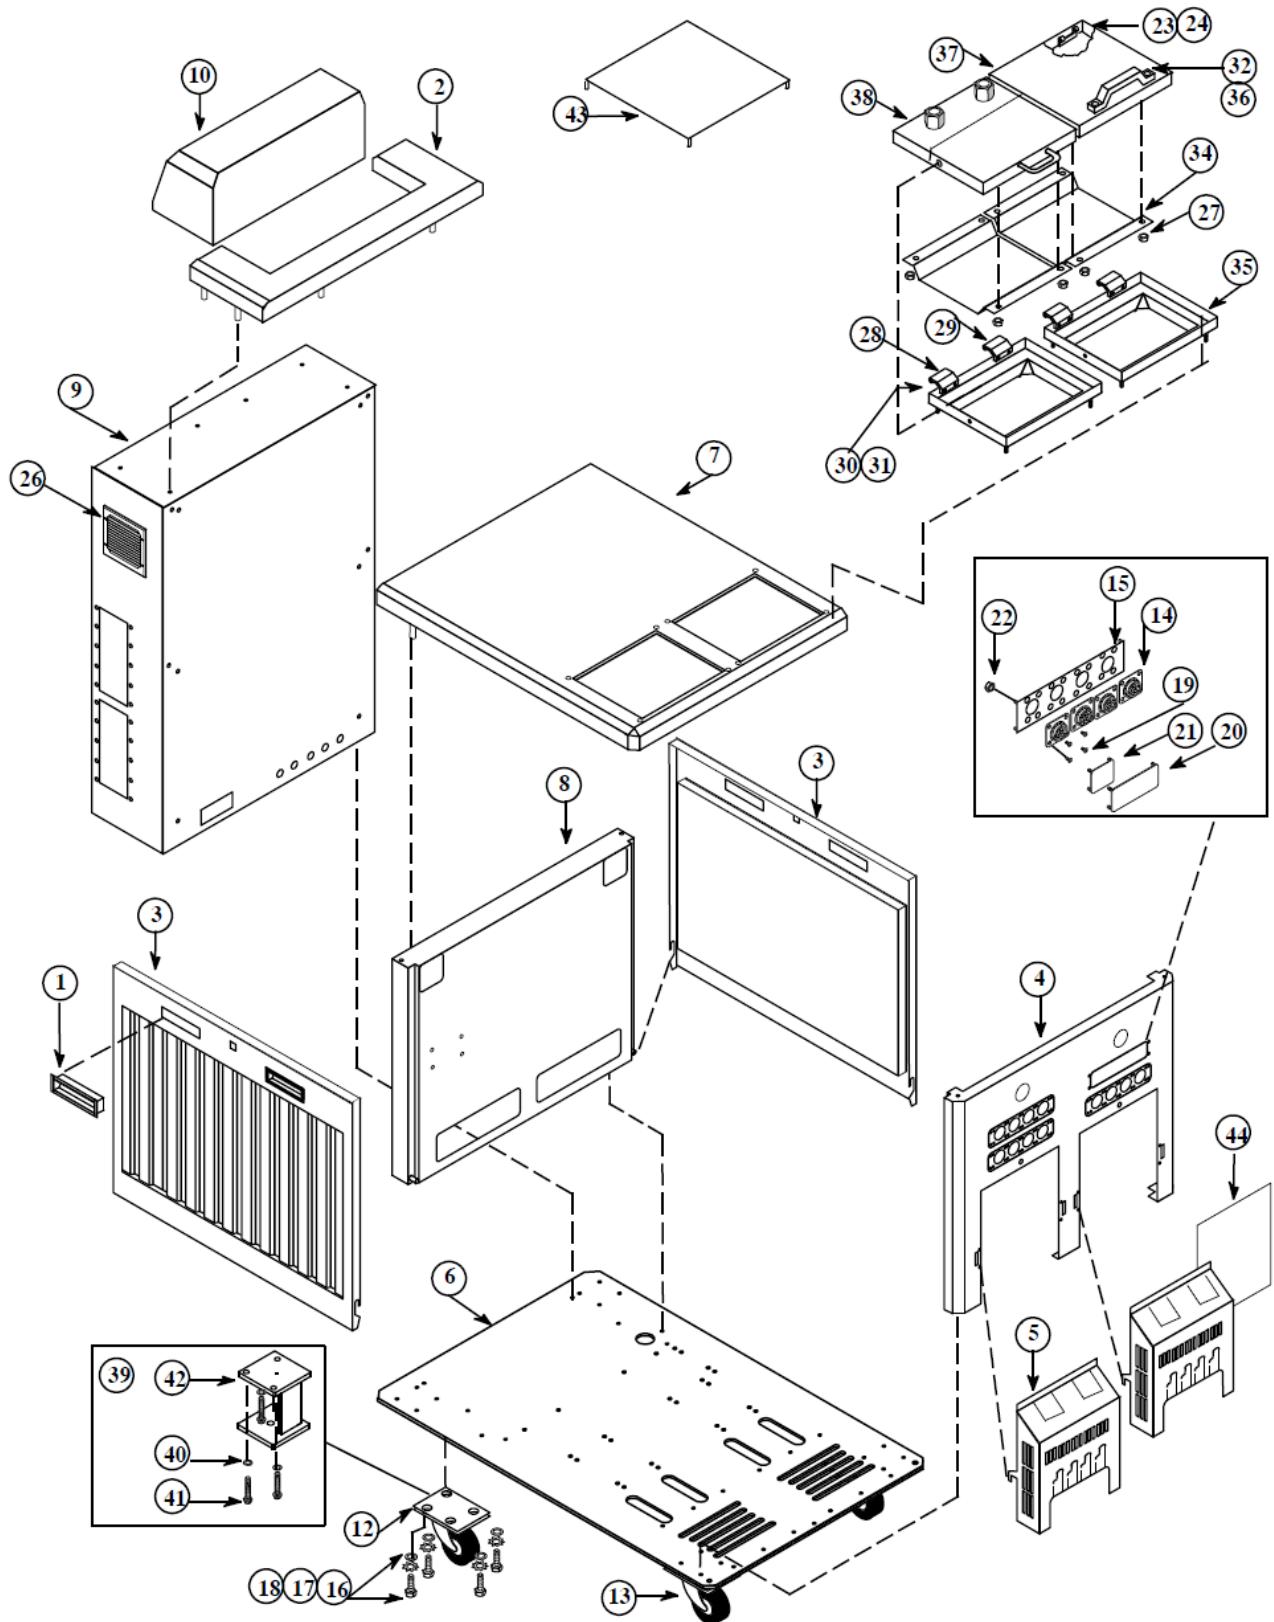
Series Cabinet Assembly, Base Assembly, PN 106045
